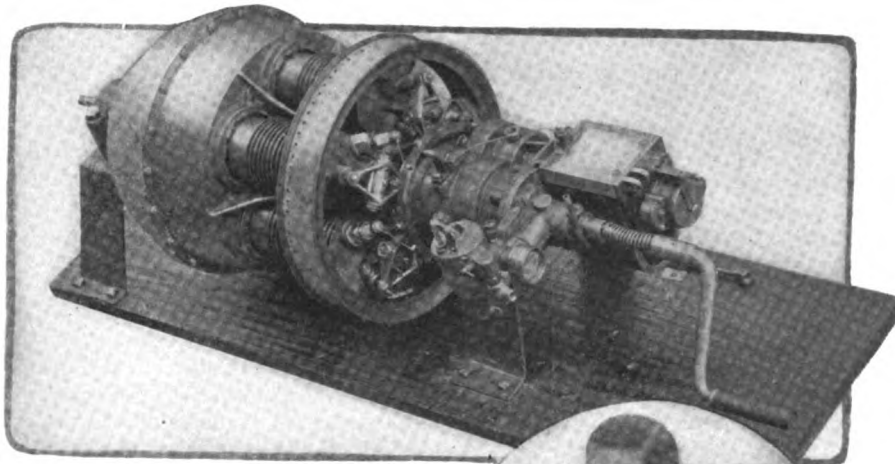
Macomber motor, showing arrangement of cylinders and valve mechanism. Note ring type, exhaust manifold with holes to expel the burnt gases
